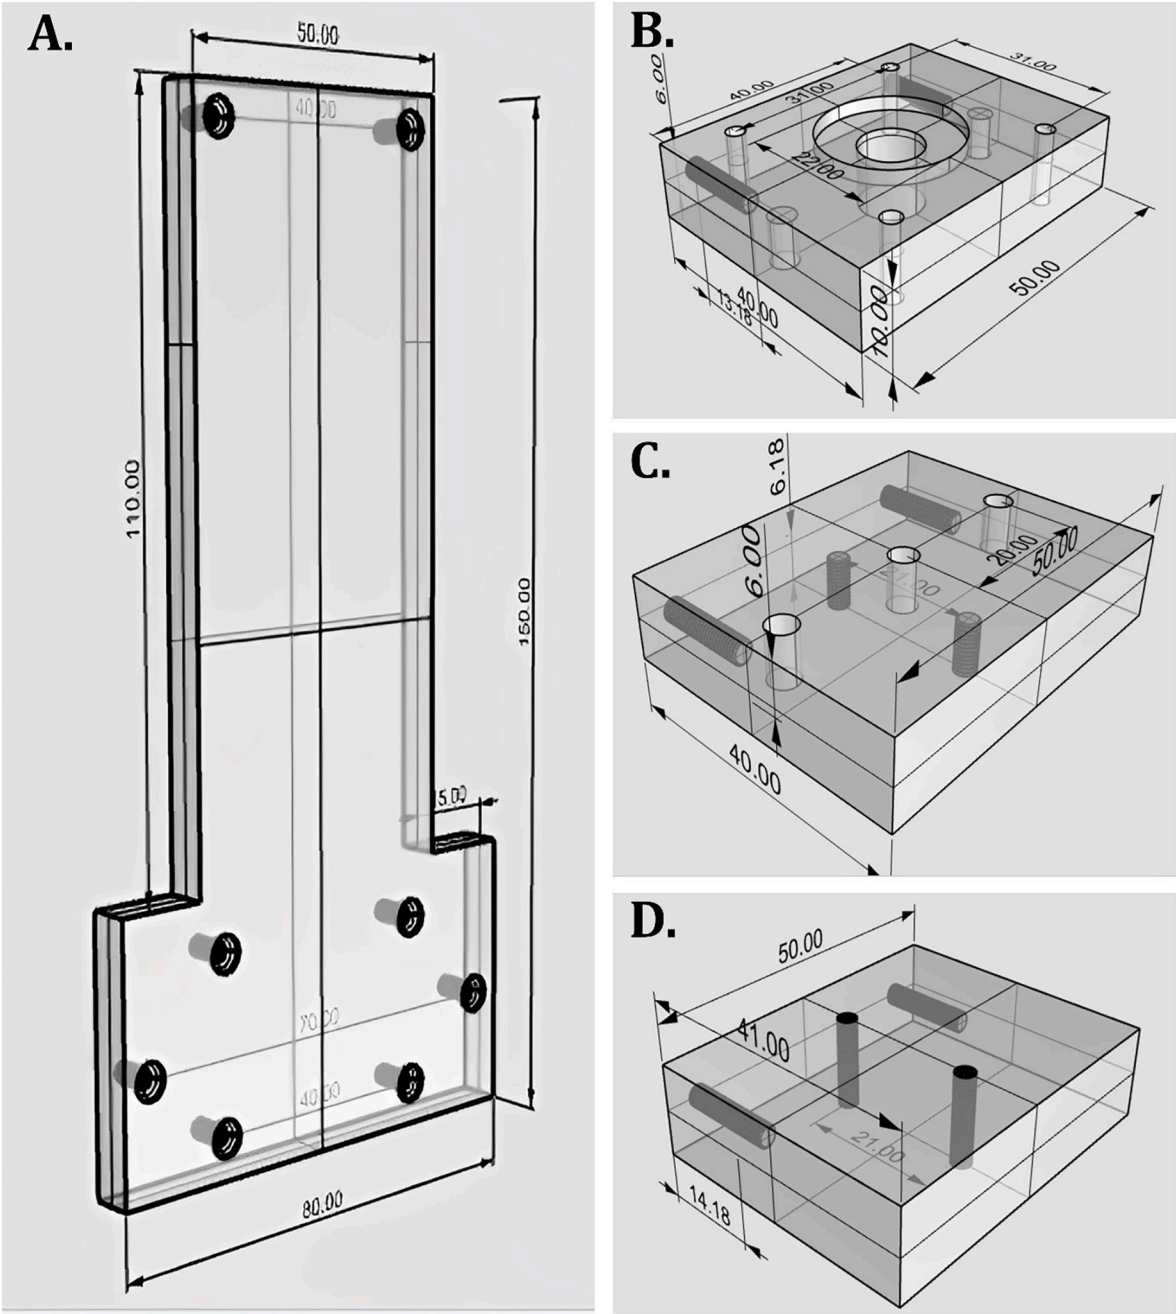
Pieces of the vertical actuator holder. A) Vertical T-shaped holder; B). Vertical actuator motor holding plate 7; C) bottom plate of the vertical actuator (8); and D) Lower supporting/attachment plate 9.
